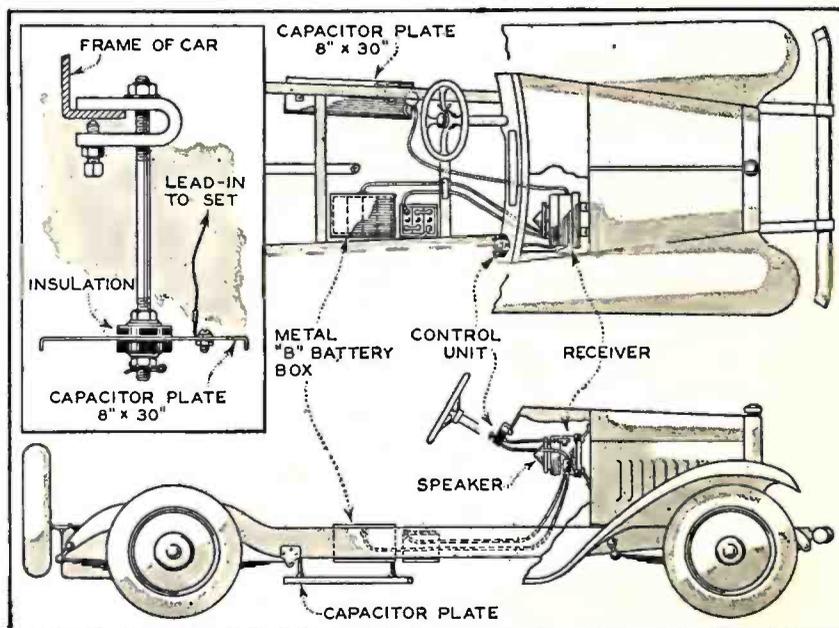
Schematic drawing of a typical Bosch motor car radio installation.
